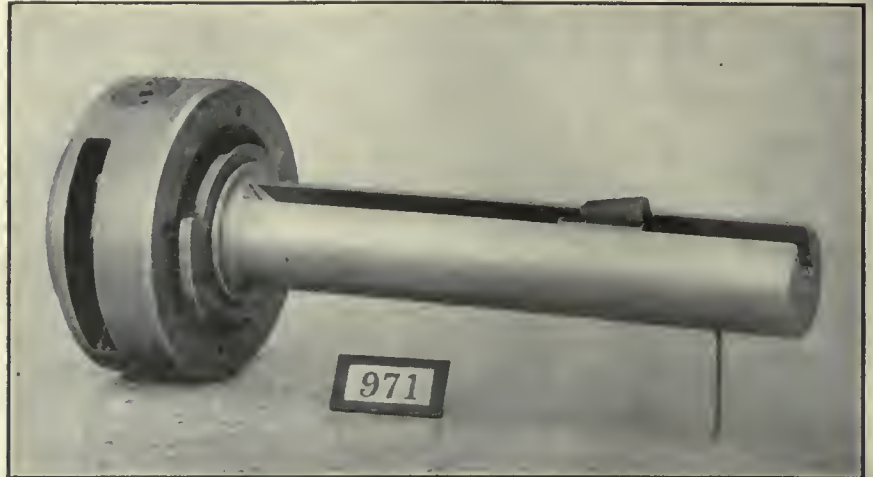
MARVIN & CASLER BORING BAR ASSEMBLED.
